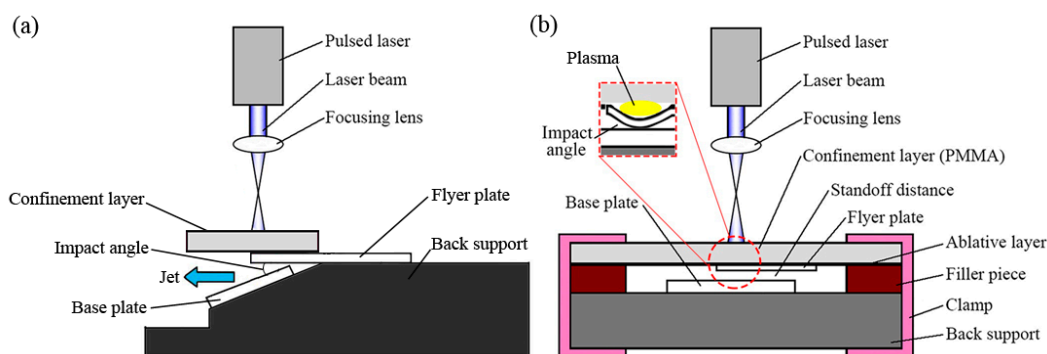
Schematic diagram of laser impact welding: (a) angle welding [16]; (b) parallel welding [17].
